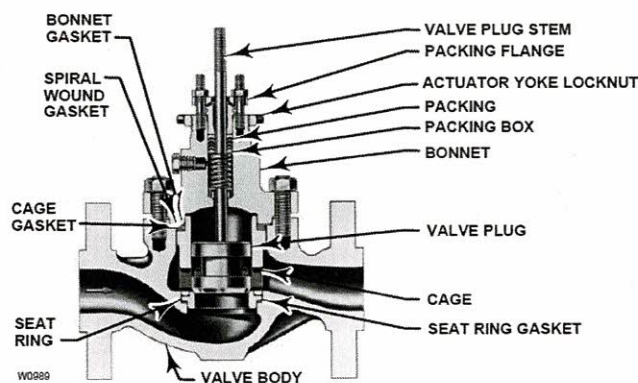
Cage guided globe valve (courtesy of Emerson Process Management).
